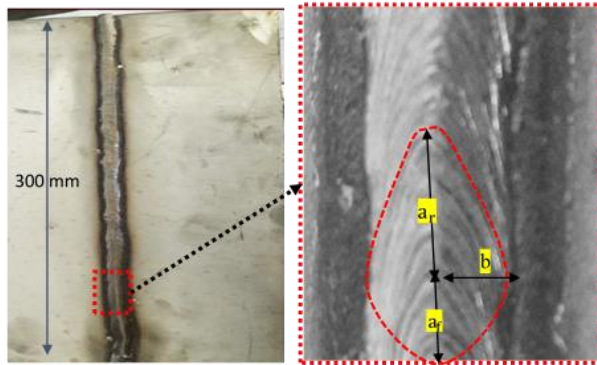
The welded plate and geometric parameter for modelling the welding simulation.
